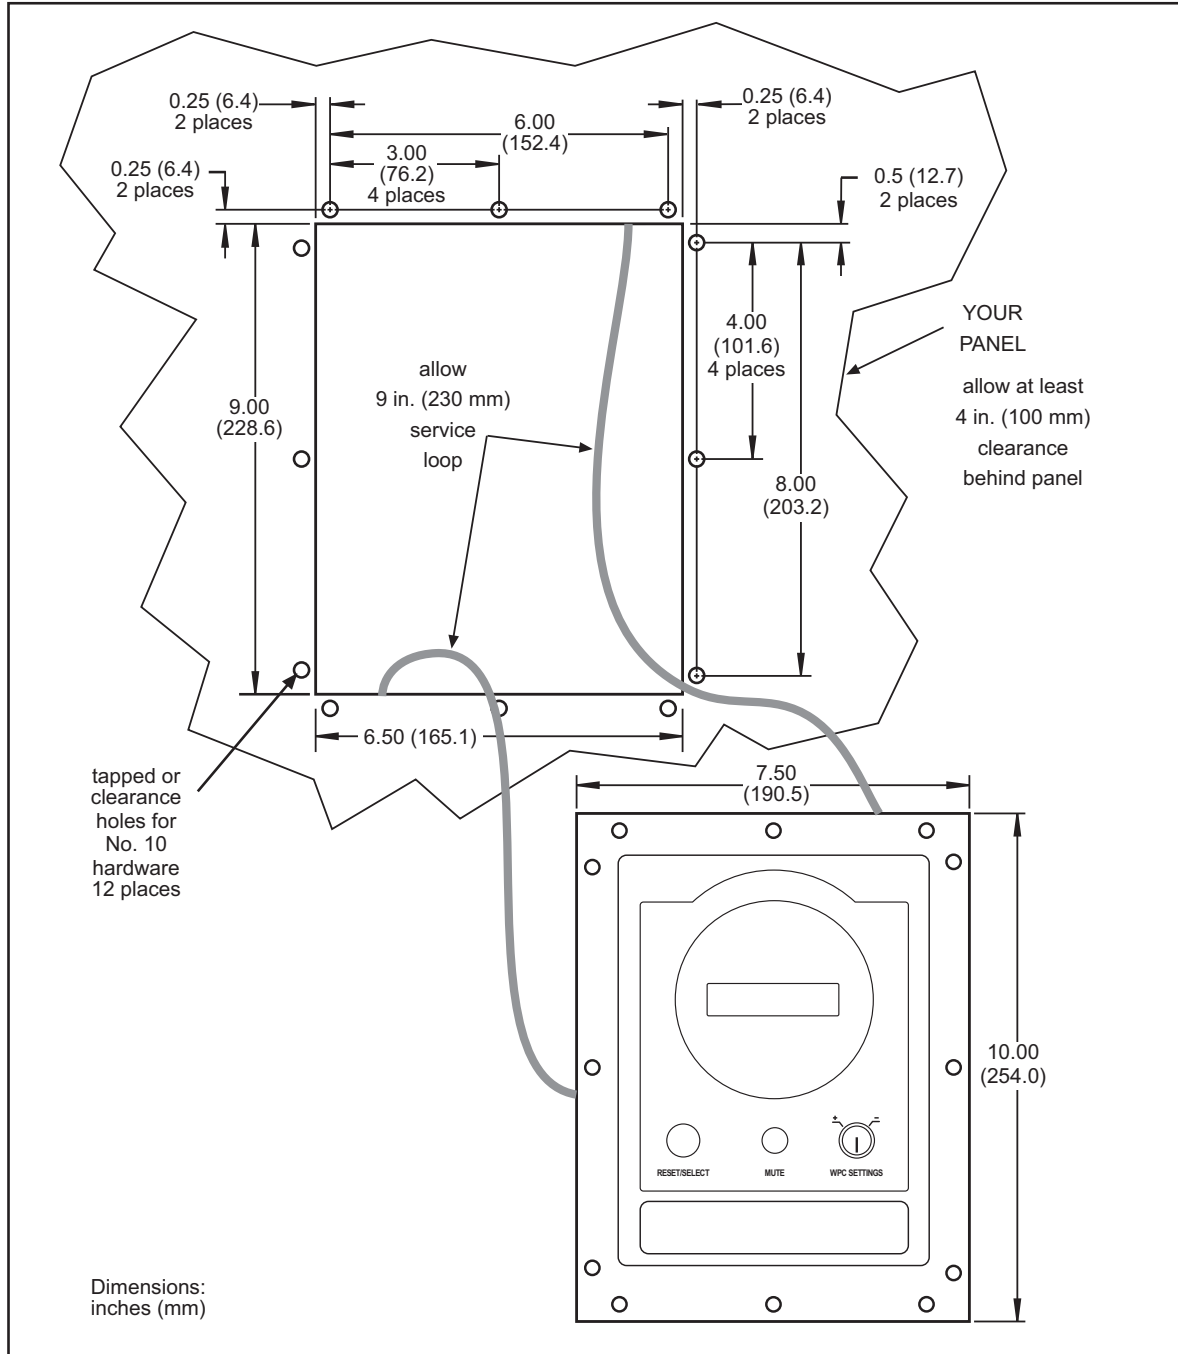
WPC 1000 Panel Mount Display: Mounting and Cutout Dimensions
